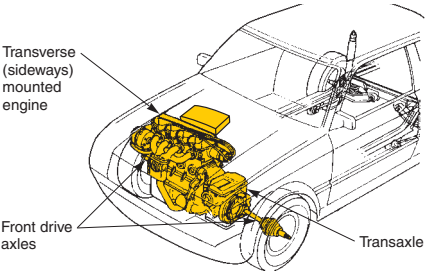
Front-wheel-drive vehicles do not have a drive shaft or a rear drive axle assembly. The complete drive train is in the front of the vehicle. (Ford)
